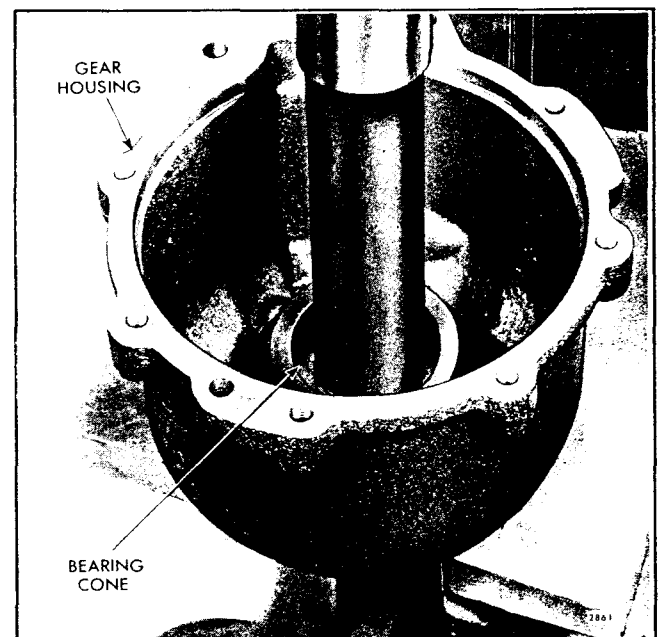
Removing Reduction Gear Drive Shaft Roller Bearing Cone and Cup from Gear Housing (2.1:1 Ratio)
